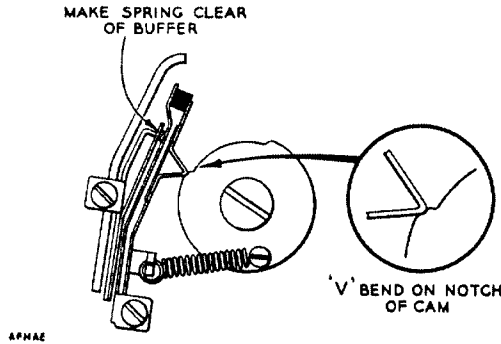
ADJUSTMENT OF AUXILIARY SPRING-SET
